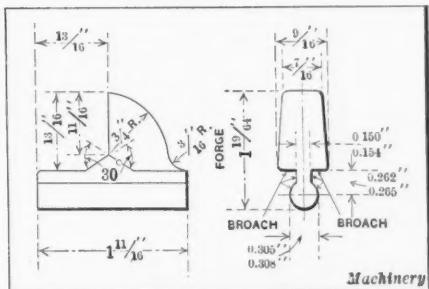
Wrench Jaw broached on Machine shown in Figs. 2 and 3
